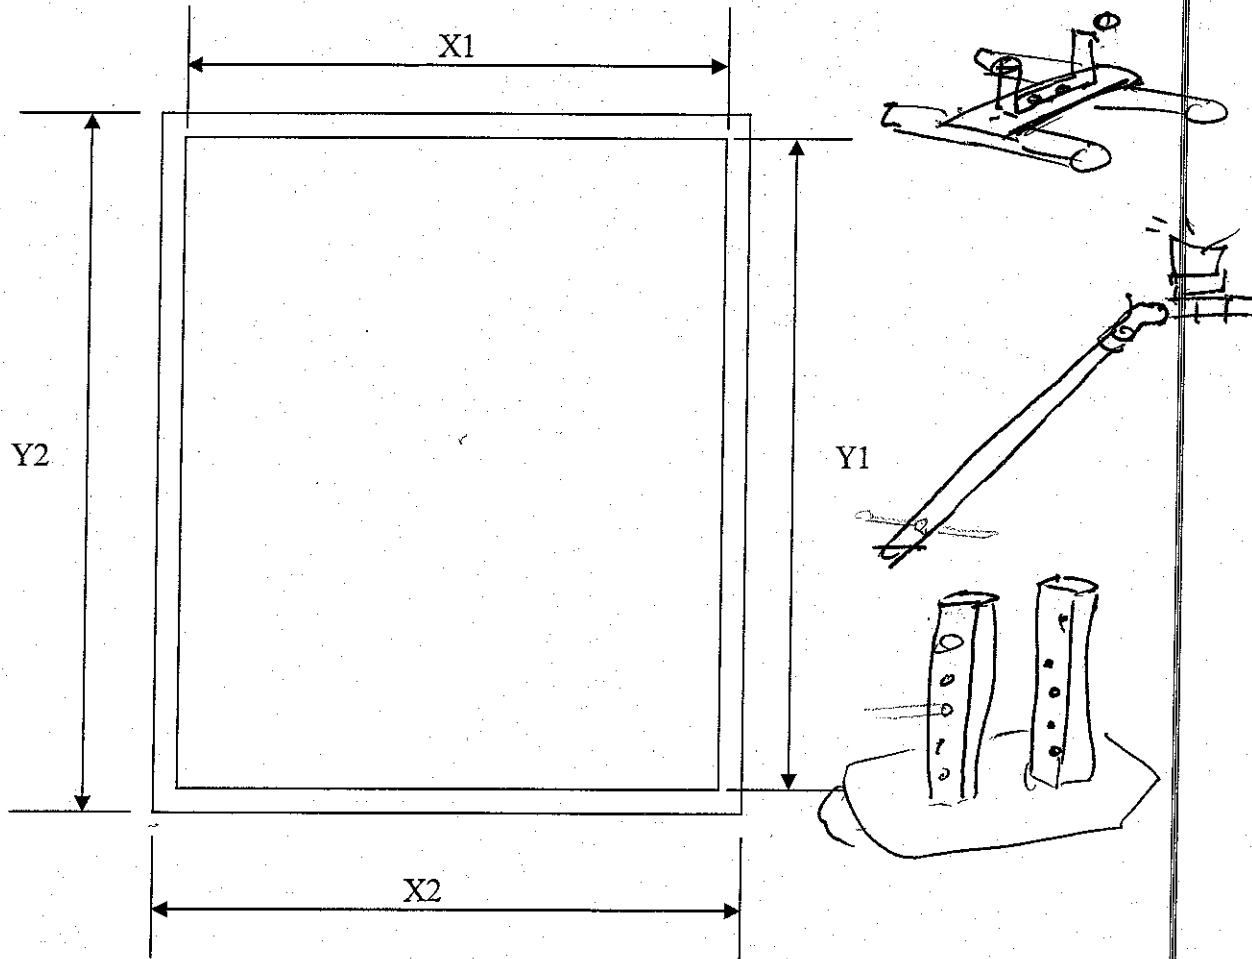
Window Frame Dimensions. X1 = 12.0 inches, X2 = 16.0 inches, Y1 = 20.0 inches, Y2 = 24.0 inches. All dimensions have tolerance ± 0.1 inch.
